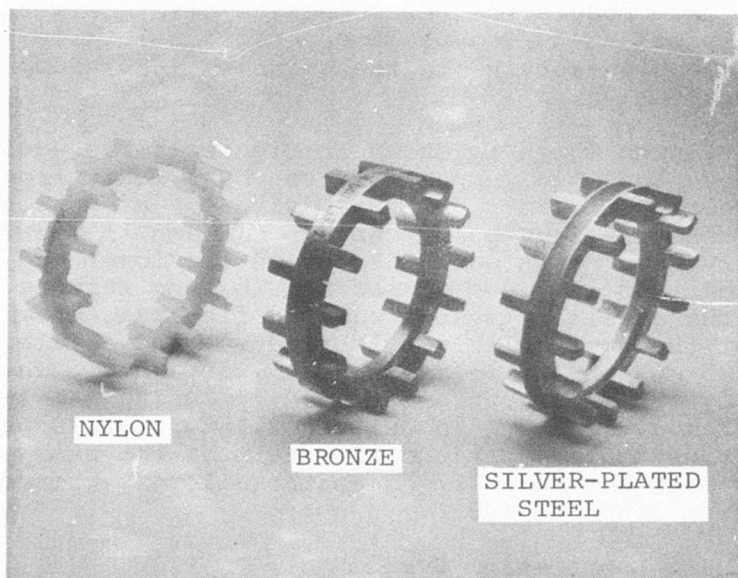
Nylon, bronze, and silver-plated steel planetary roller bearing retainers.
